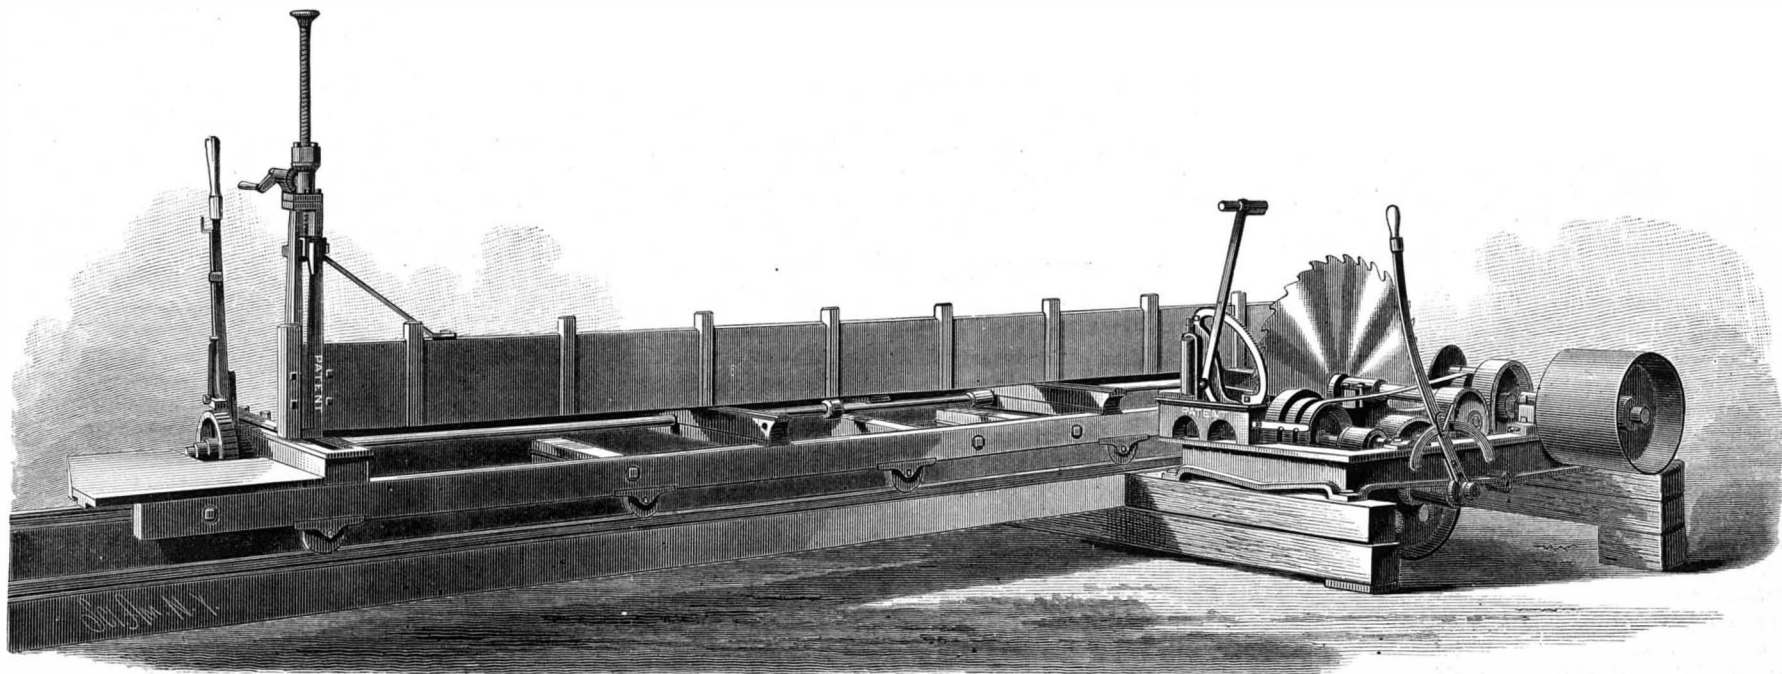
NEW CIRCULAR SAW MILL MADE BY THE TAYLOR MANUFACTURING COMPANY.
